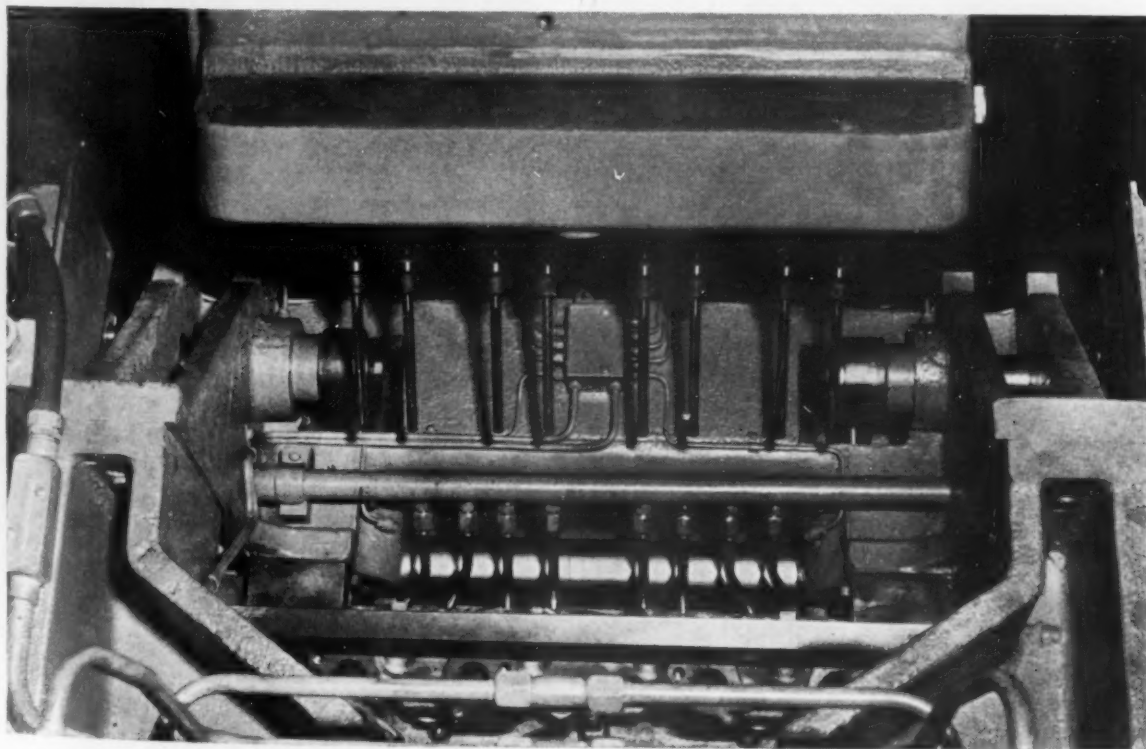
At this final station of the transfer machine, eight carbide reamers make the final cuts
